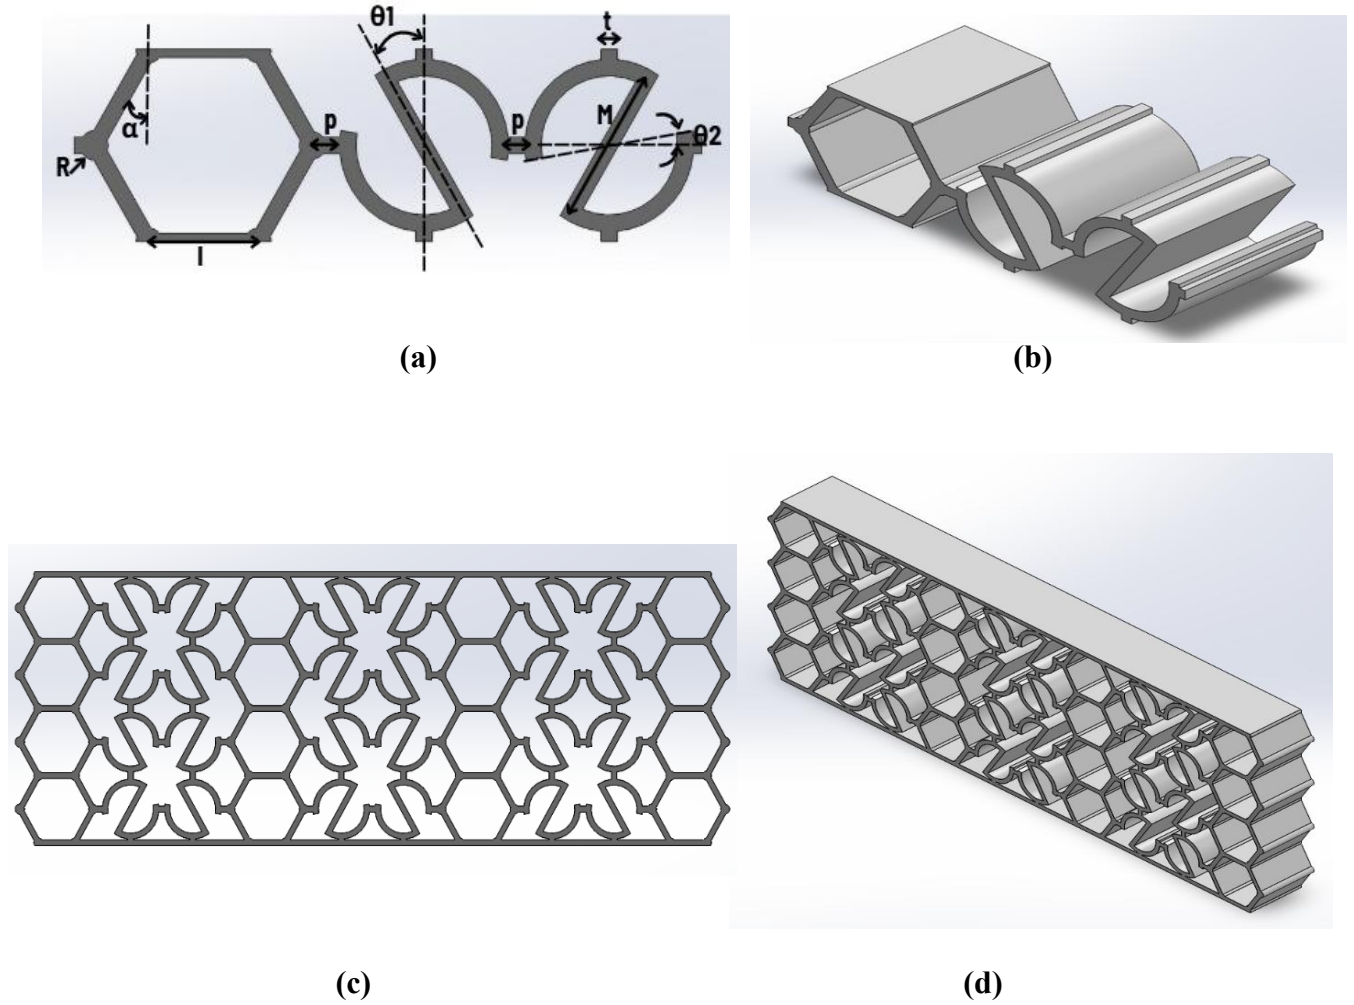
(a) Unit cell of Hybrid Hex-S with dimensions, (b) Isometric View of Hybrid Hex-S unit cell, (c) Front view of Hybrid Hex-S, and (d) Isometric View of Hybrid Hex-S
